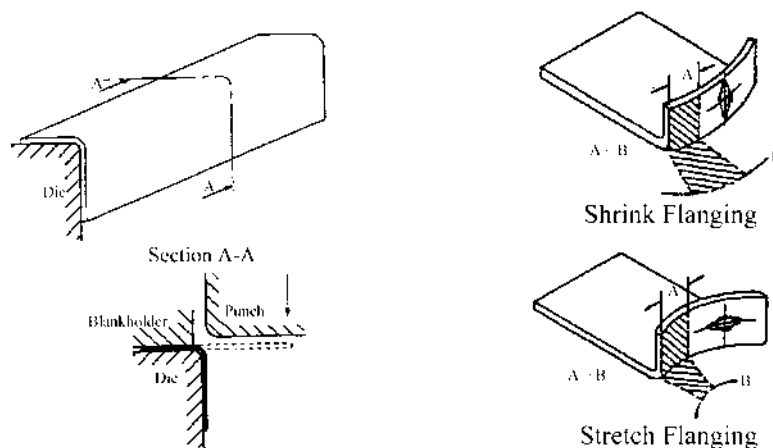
Bending and flanging of sheet metal. (From Ref. 27.)
